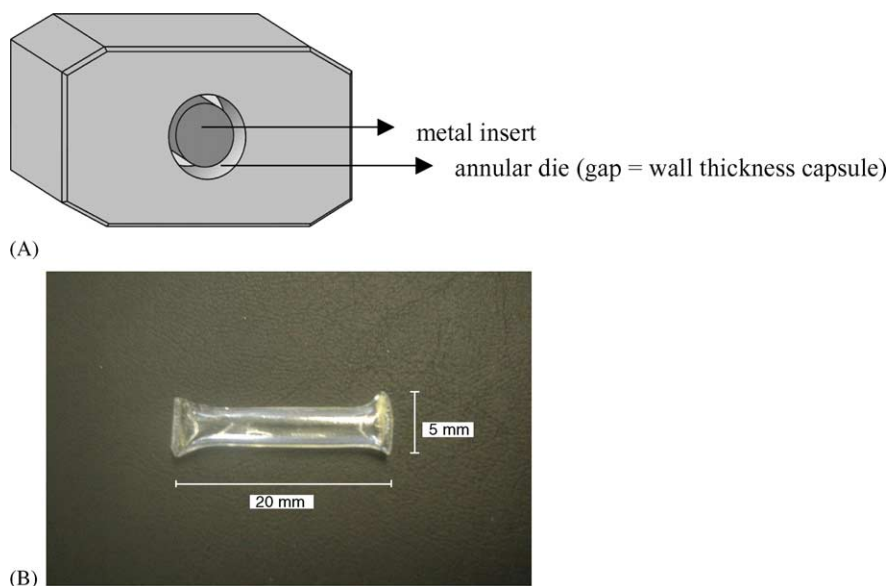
(A) Schematic drawing of the die used for the extrusion of the capsules and (B) a hot-melt extruded enteric capsule.
